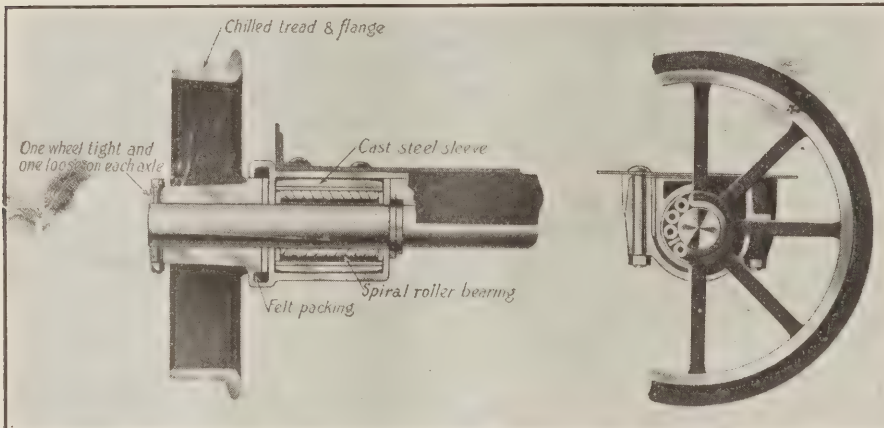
SPIRAL ROLLER BEARING APPLIED TO A MINE CAR
